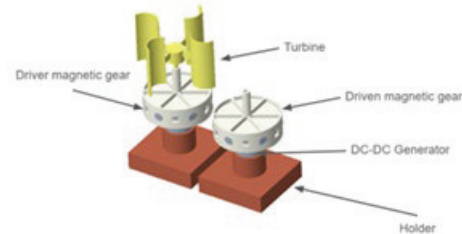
Final assembly of Magnetic Gear Operated Wind Turbine
